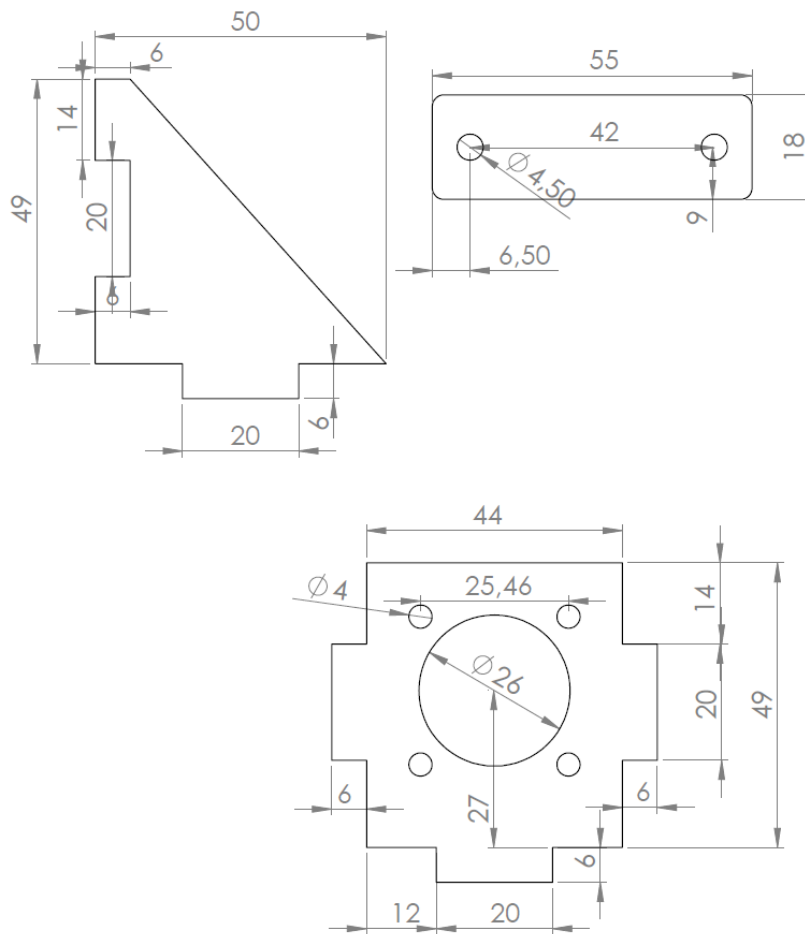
Drawings of the motor and bearing support parts. Dimensions are in millimetres. Thickness of the parts is 6 mm.
